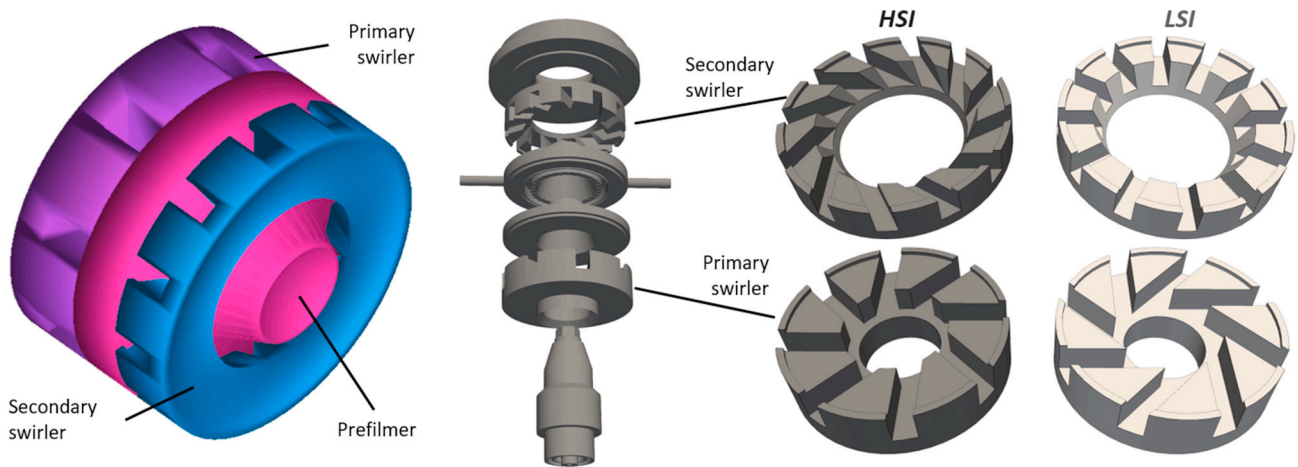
Assembly and geometries of the primary and secondary swirlers.
